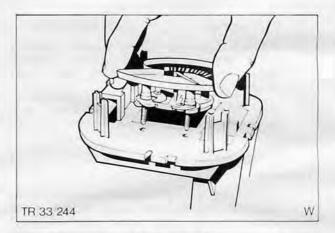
Removing gauge from housing. Take care not to mark gauge face
